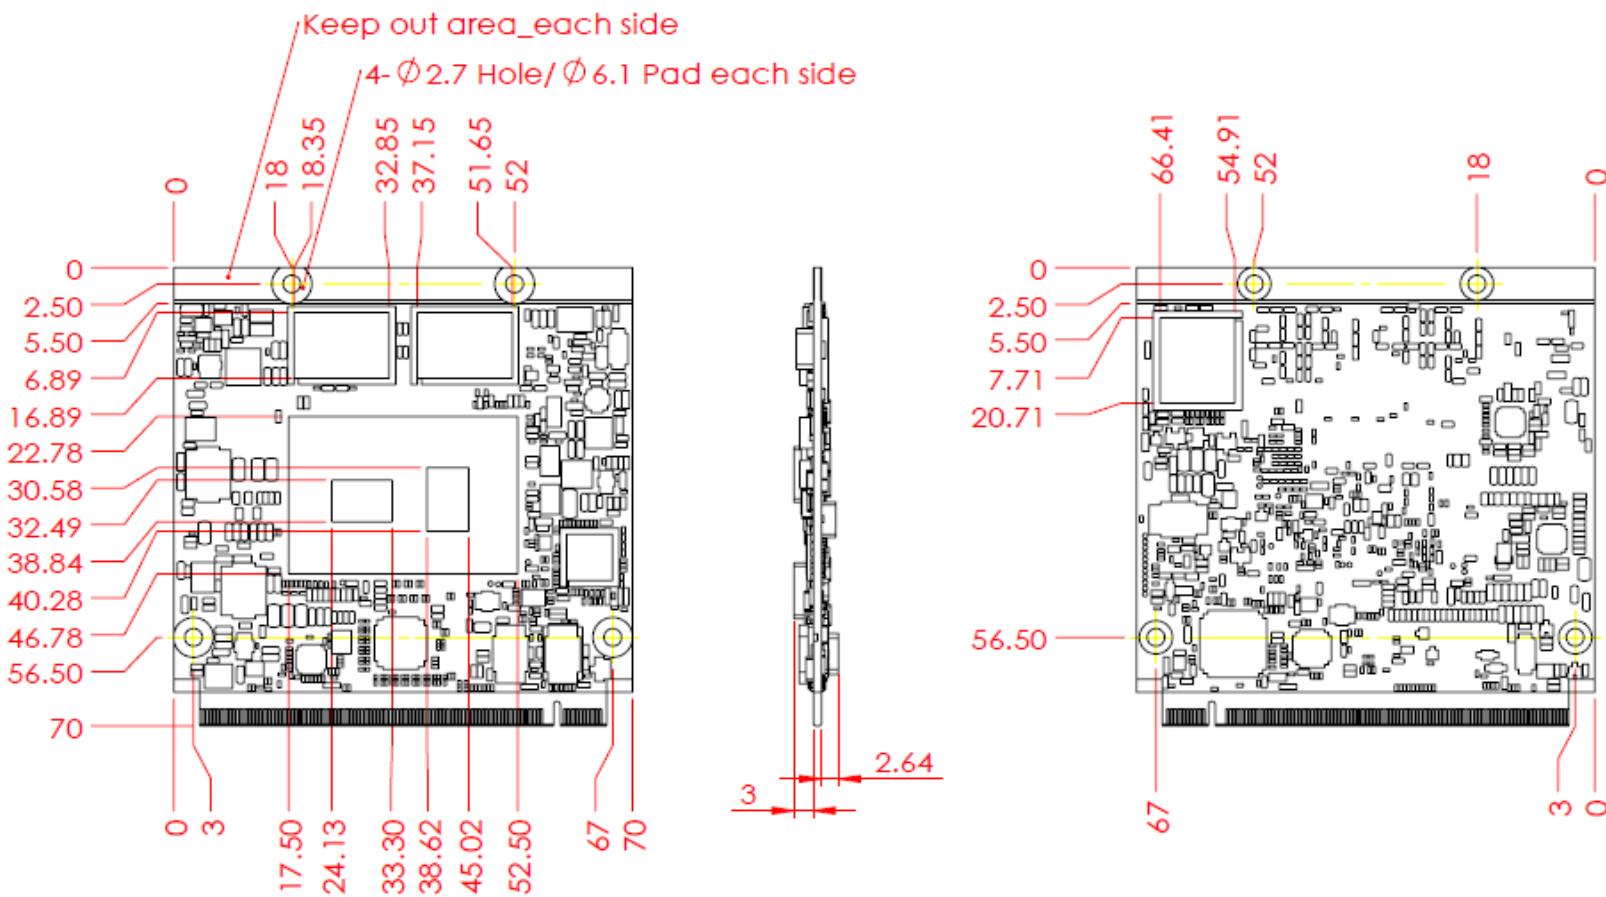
Mechanical Dimensions with EHL N/J Series - Top/Bottom
